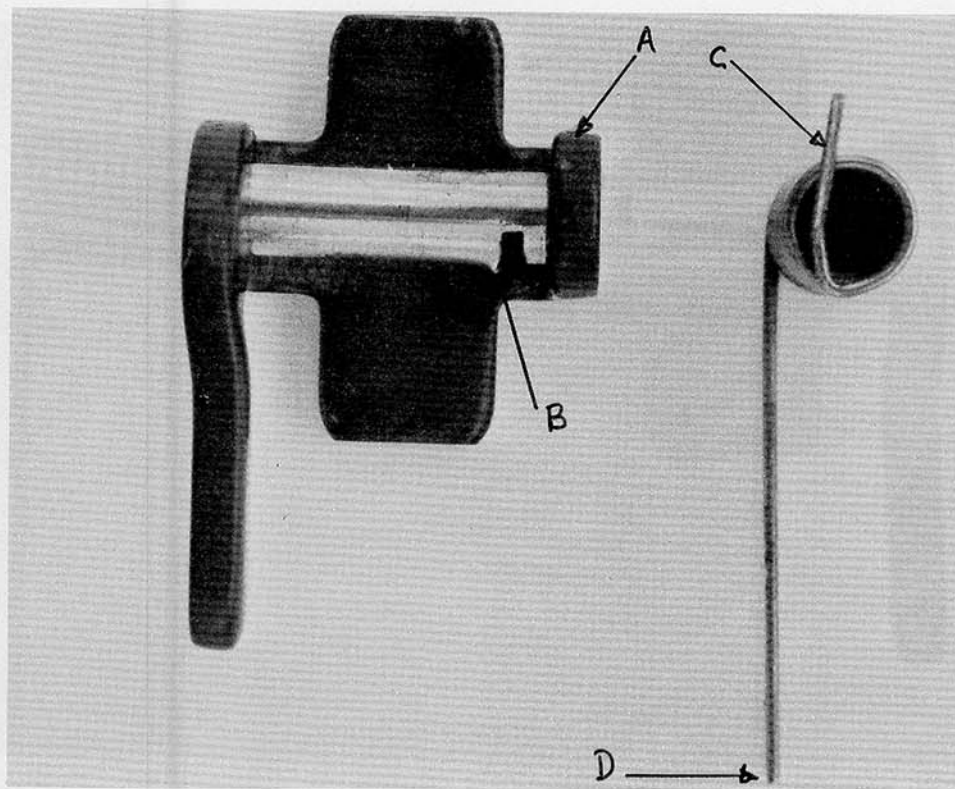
Test rifle automatic sear assembly partially disassembled.
